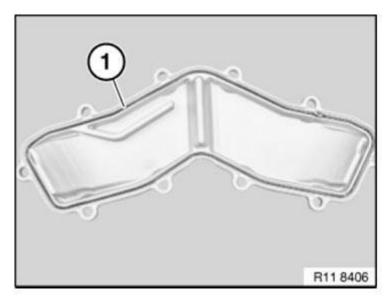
Identifying Profile Seal Courtesy of BMW OF NORTH AMERICA, INC.
